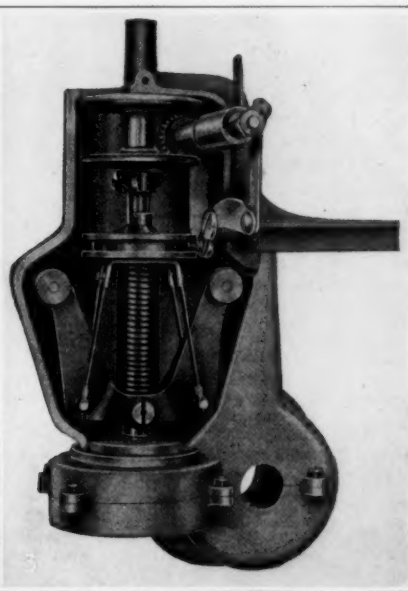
SECTIONAL VIEW OF THE GOVERNOR SHOWN IN FIG. 6
